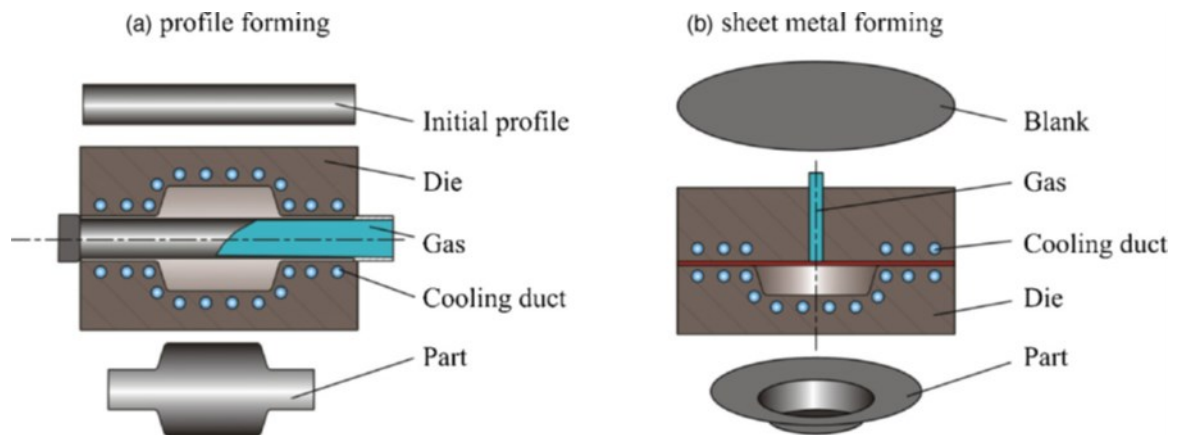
(a) Gas forming of profile and (b) sheet. [63]
